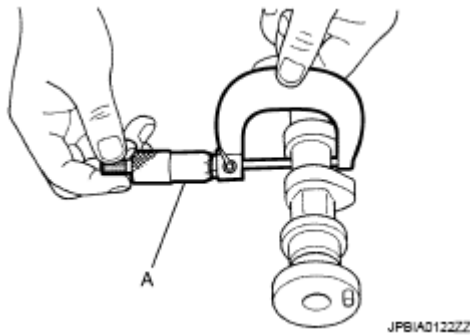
Measuring Outer Diameter Of Camshaft Journal
